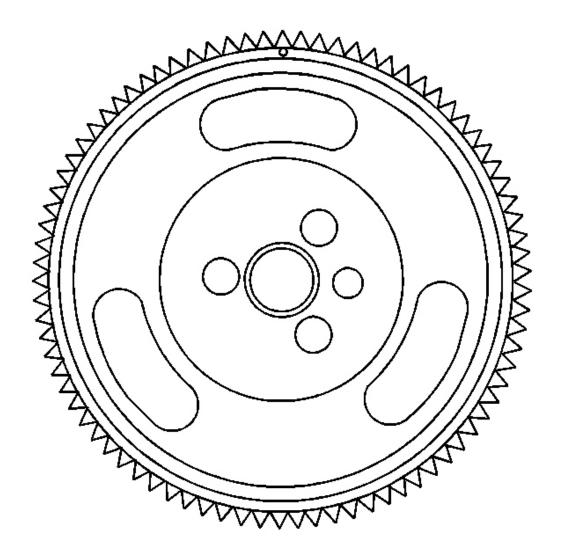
Balance Shaft Drive Gear Camshaft Timing Mark Courtesy of GENERAL MOTORS CORP.
